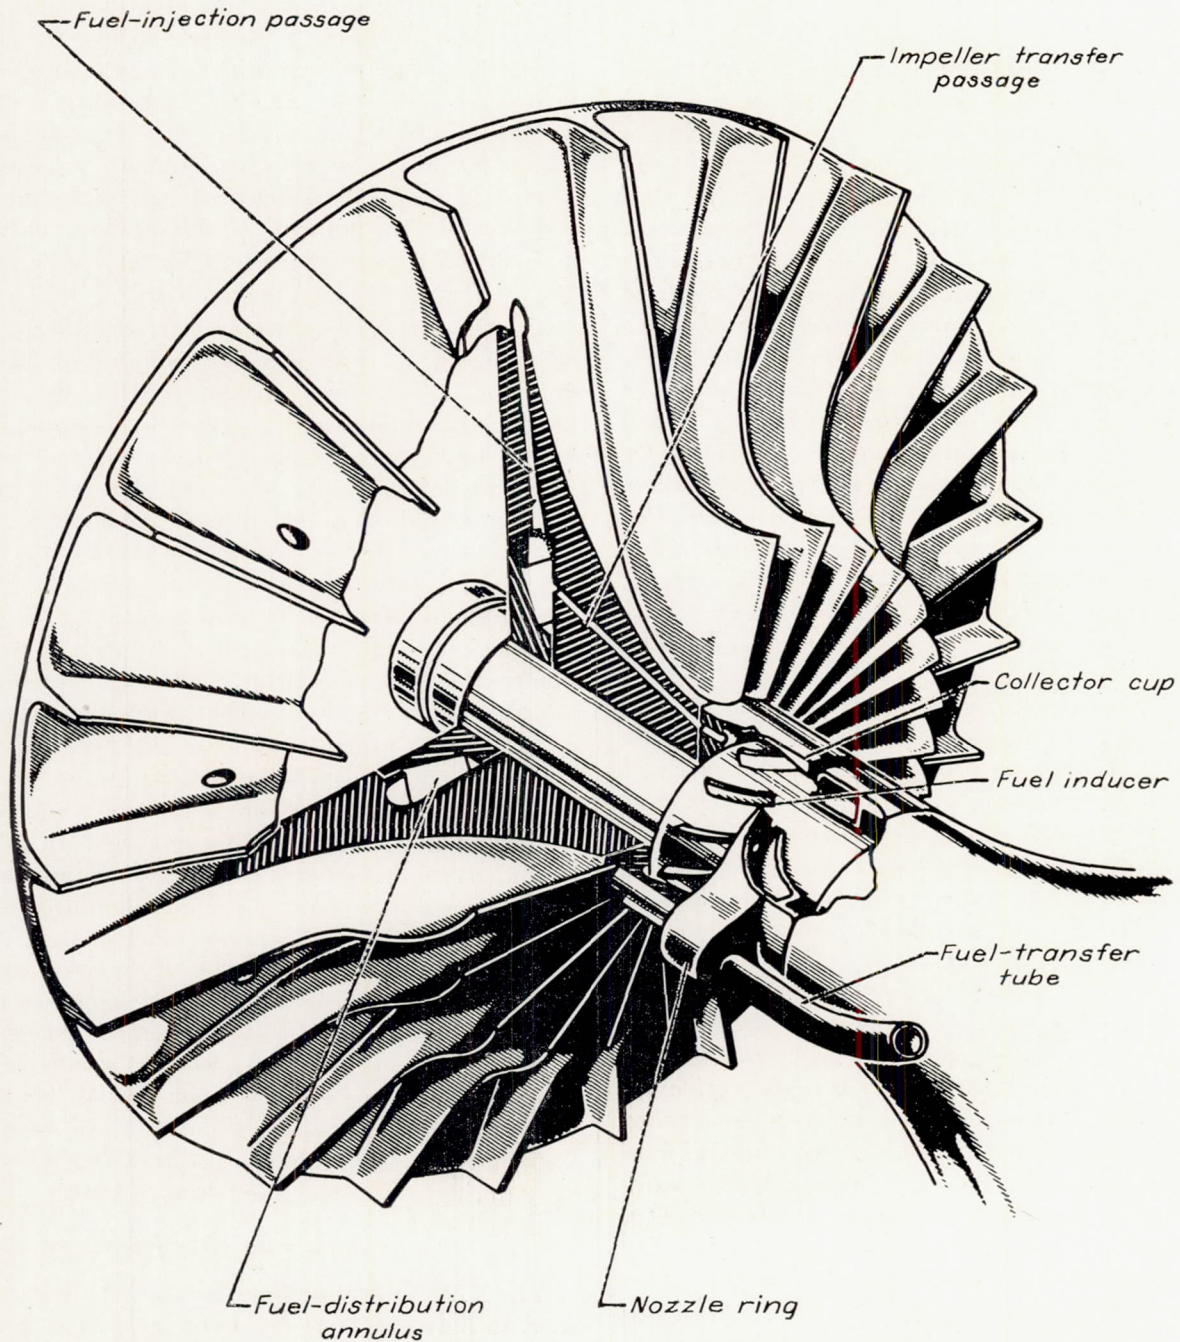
NACA injection impeller designed for installation on double-row radial aircraft engine.
